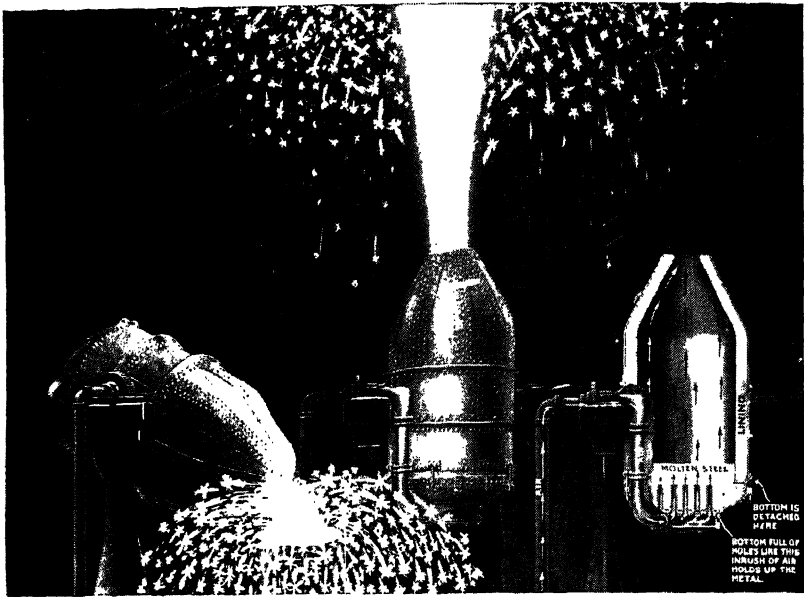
Three views of a Bessemer converter: left, tipped; center, in action; right, cross section
